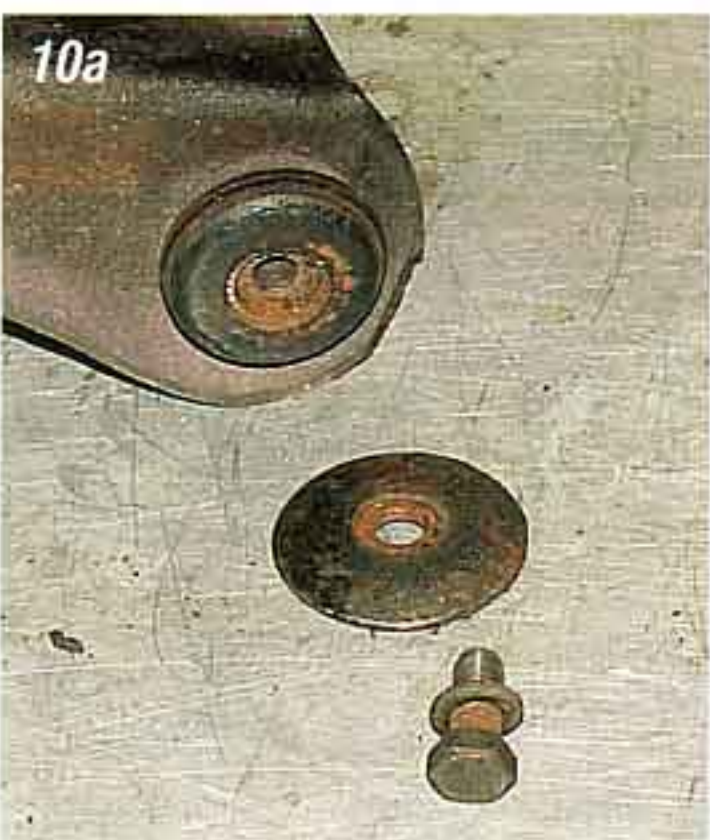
, 10b & 10c: The upper and lower control arm bushings are held in place with a bolt and large cupped washer on each end of the control arm shaft. Remove the bolt and washer. Using an air hammer and chisel, carefully remove the bushings from the control arms. The left and right upper control arm shafts are the same, while the left and right lower shafts
